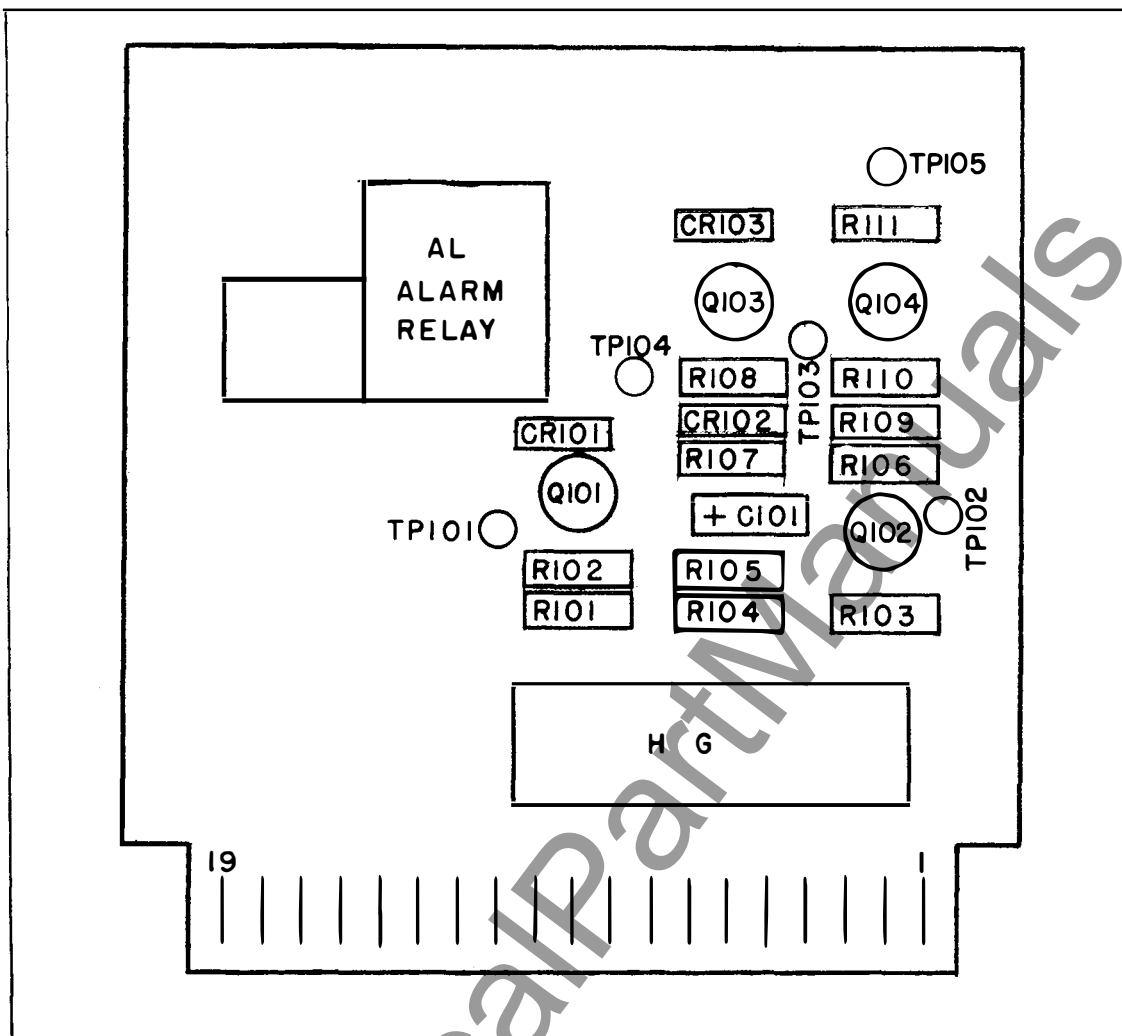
Component Locations on the Relay Output Printed Circuit Board.
